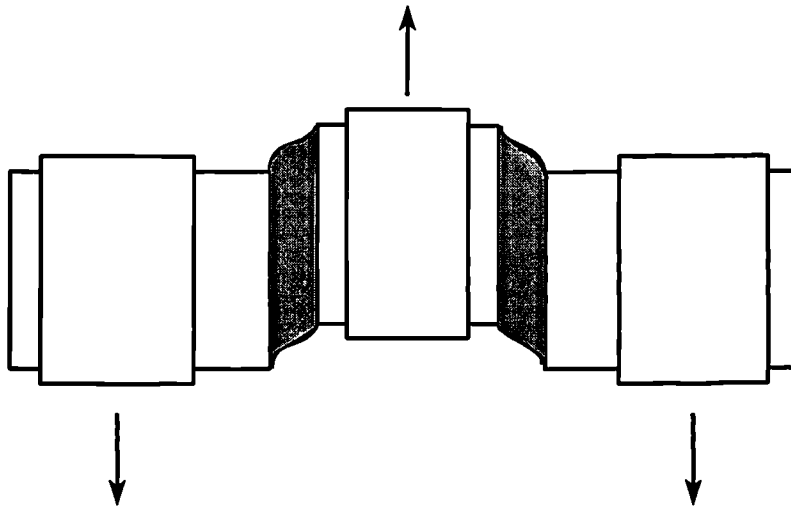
Deformed double shear testpiece showing schematically bending of unbonded edges. (see Chapter 6)
